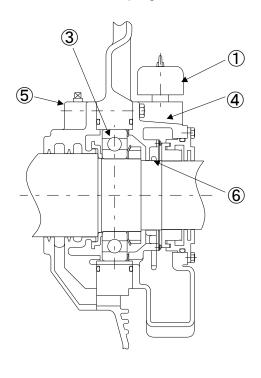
Configuration of Antifriction Bearings With Typical Grease Lubrication
